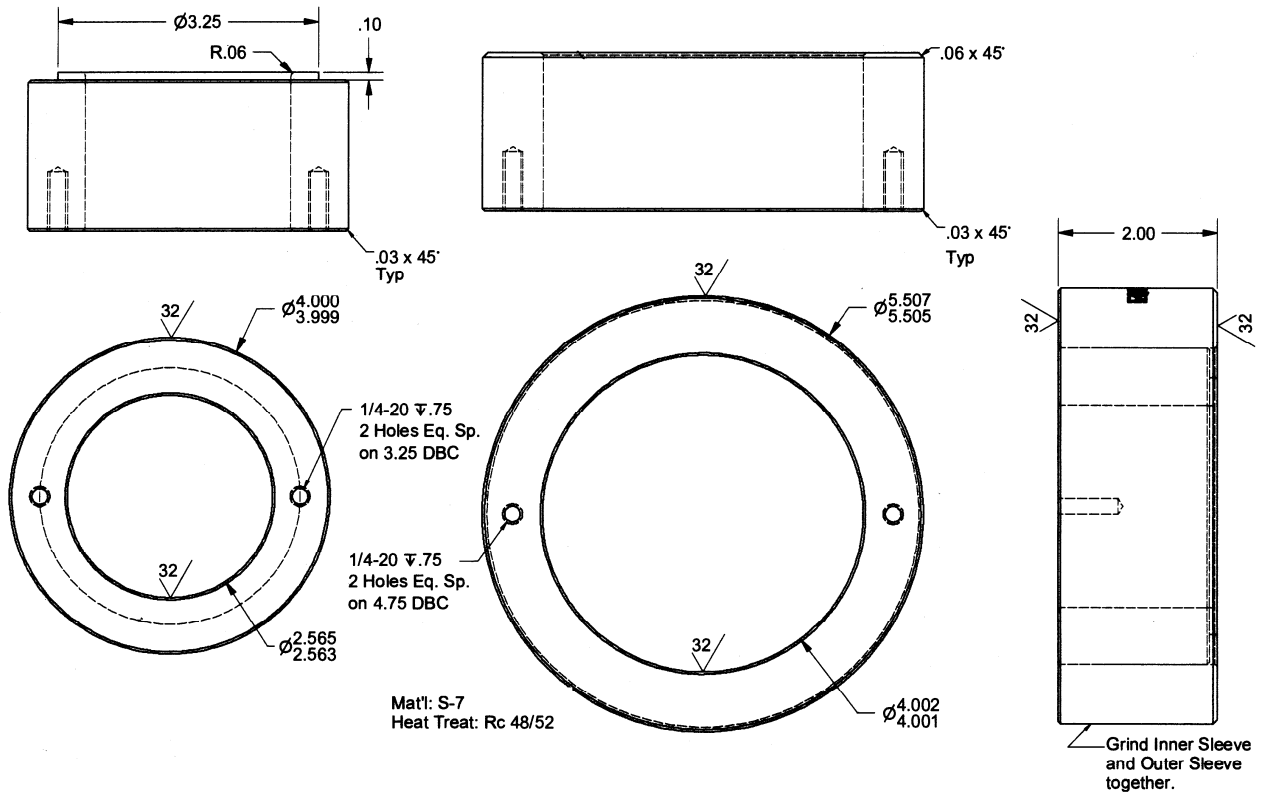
FALSE BEARING (EQ1440221-07)
